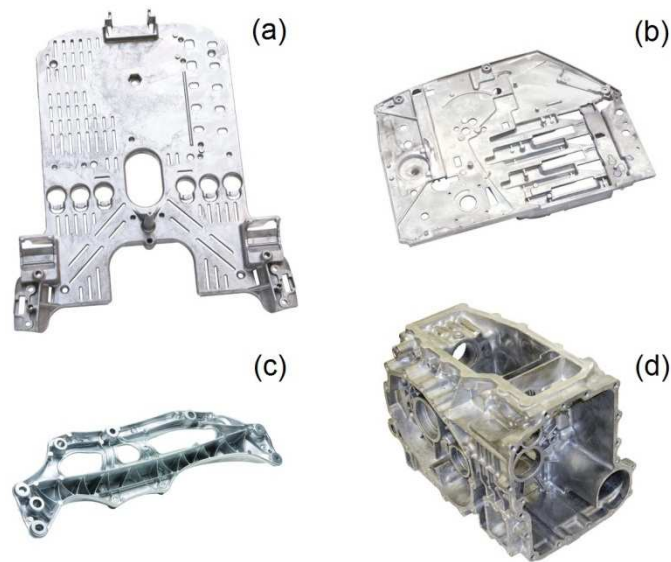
parts produced with HPDC: a dental chair component (a), a medical imager side wall (b), an engine base bracket (c) and a transaxle housing (d).
